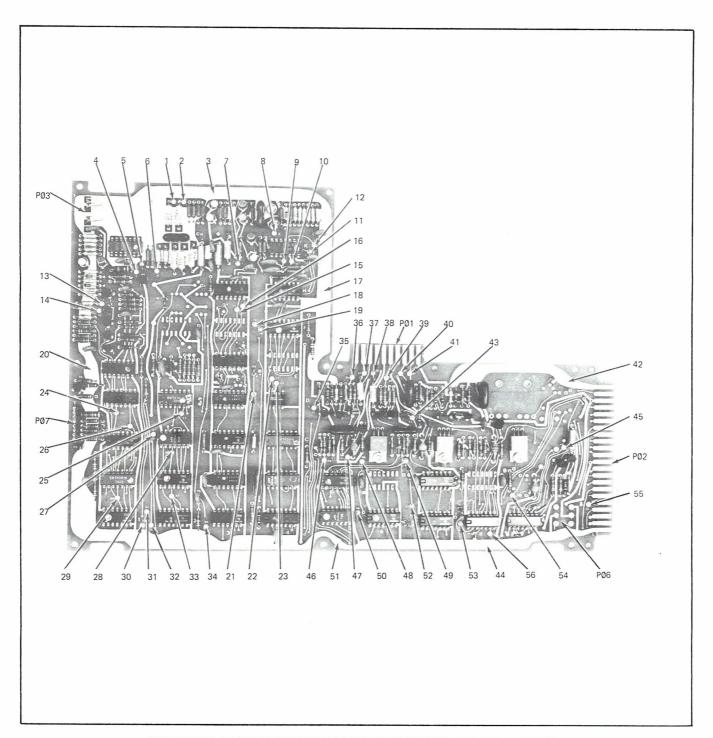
ELECTRONIC PC BOARD TEST POINTS AND CONNECTORS
